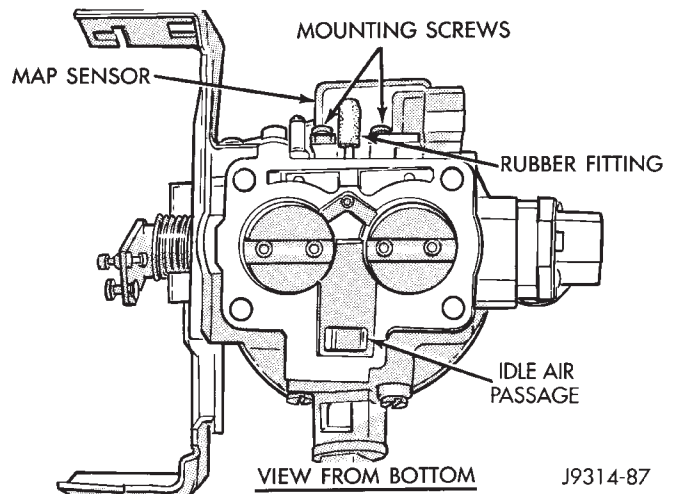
Throttle Body Air Control Passage—5.2L Engine
